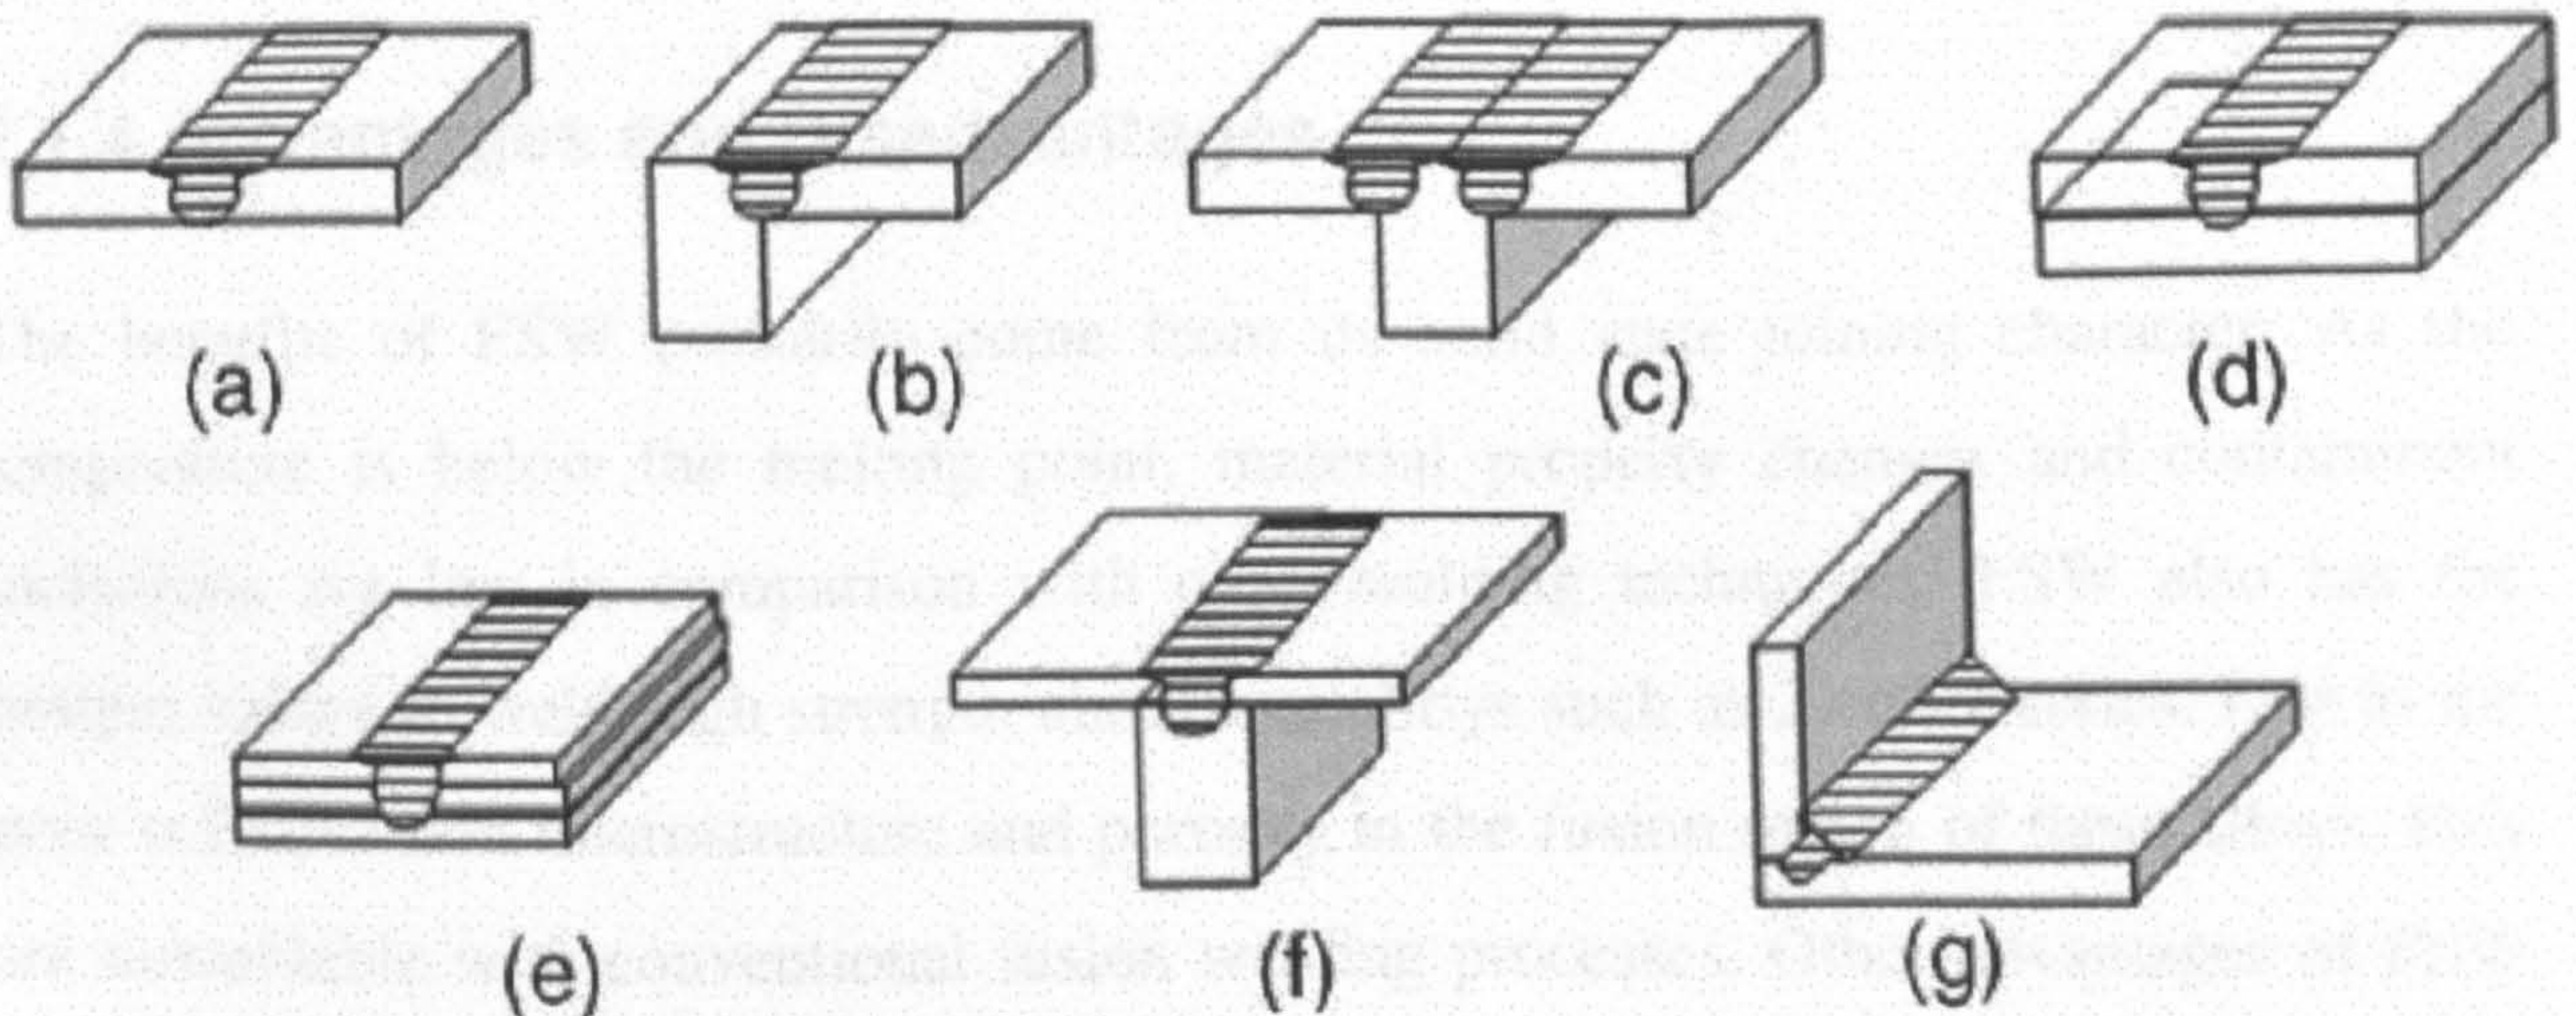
Joint configurations for friction stir welding: (a) square butt, (b) edge butt, (c) T butt joint, (d) lap joint, (e) multiple lap joint, (f) T lap joint, and (g) fillet joint. [2.5]
